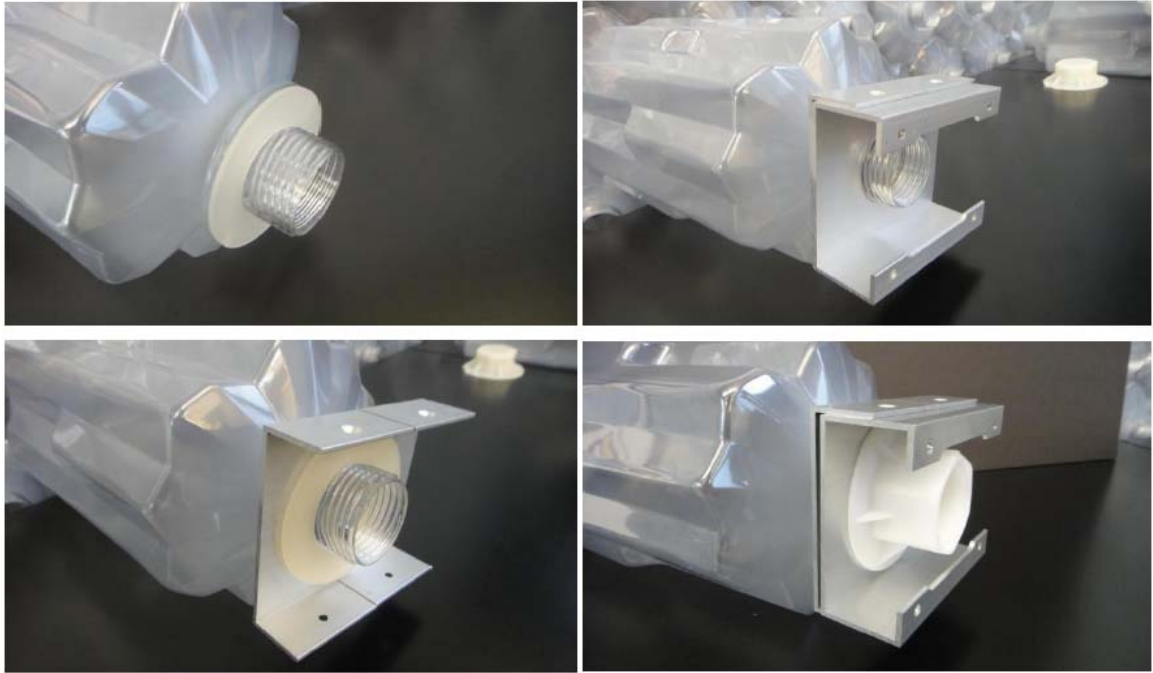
Installation of C-channel steel plates, MINIWIZ, March 16, 2011 (Photo Source: author)
